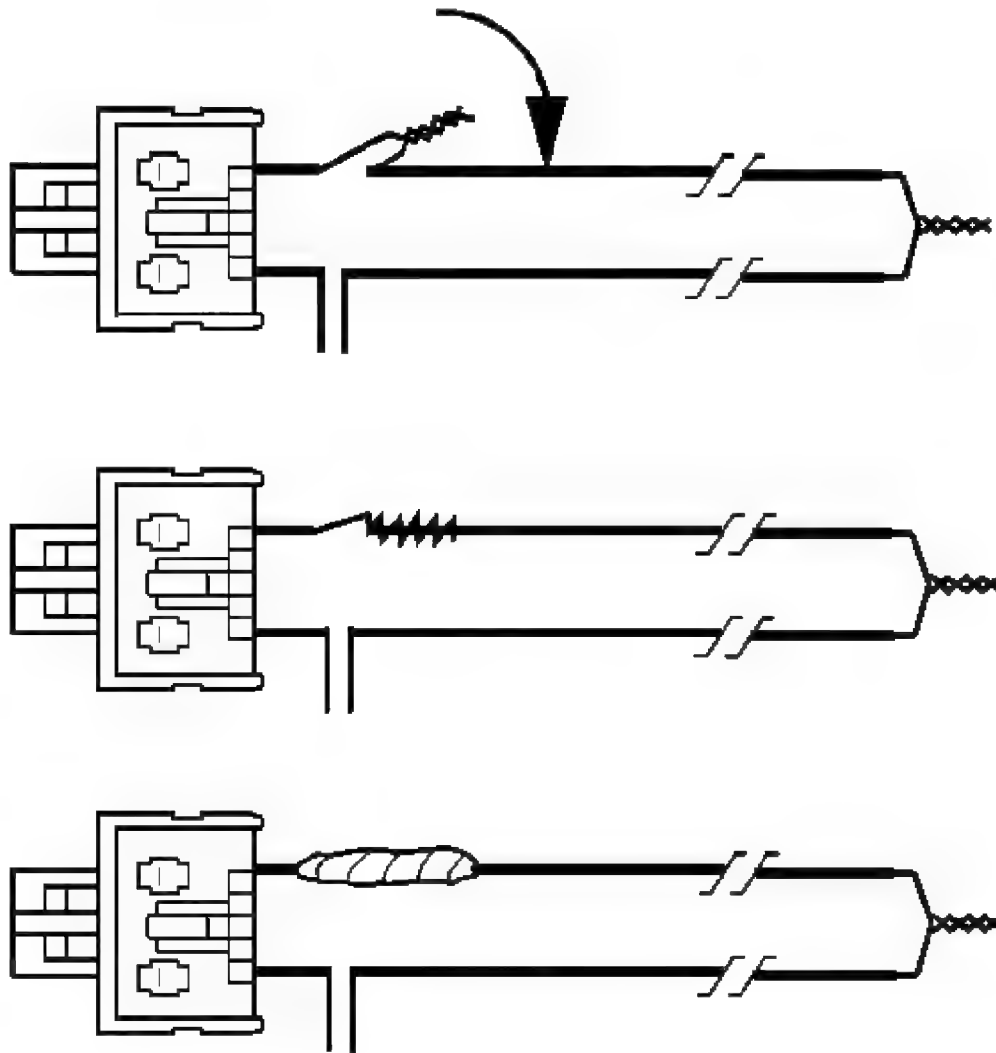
Bending Twisted Connection Flat & Insulating With Tape
